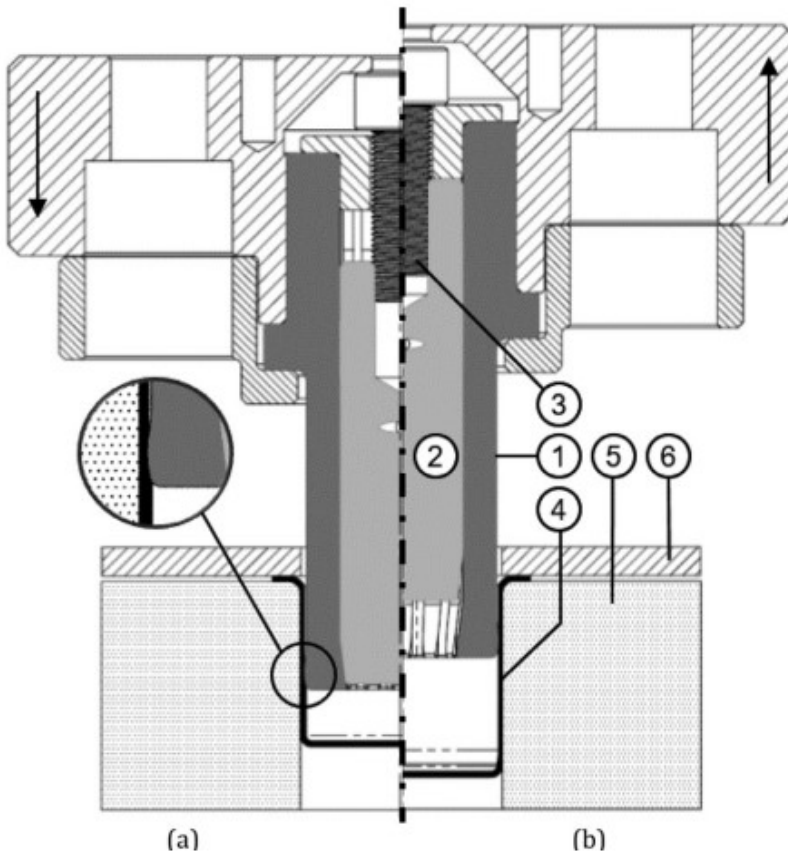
Sectional view of prototype ironing punch with adjustable diameter shown during (a) ironing and (b) retraction. The main components are (1) hollow punch, (2) mandrel, (3) actuator screw, (4) workpiece, (5) die, and (6) blank holder for clamping the workpiece flange. Figure obtained from [10].
